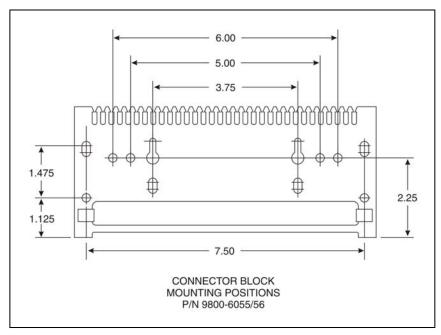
289H CONNECTOR BLOCK MOUNTING POSITIONS
